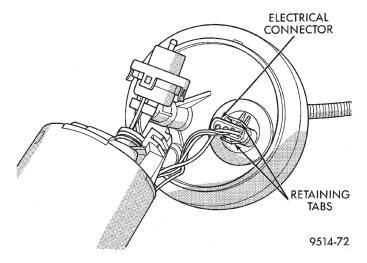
Fuel Pump/Level Sensor Electrical Connector
